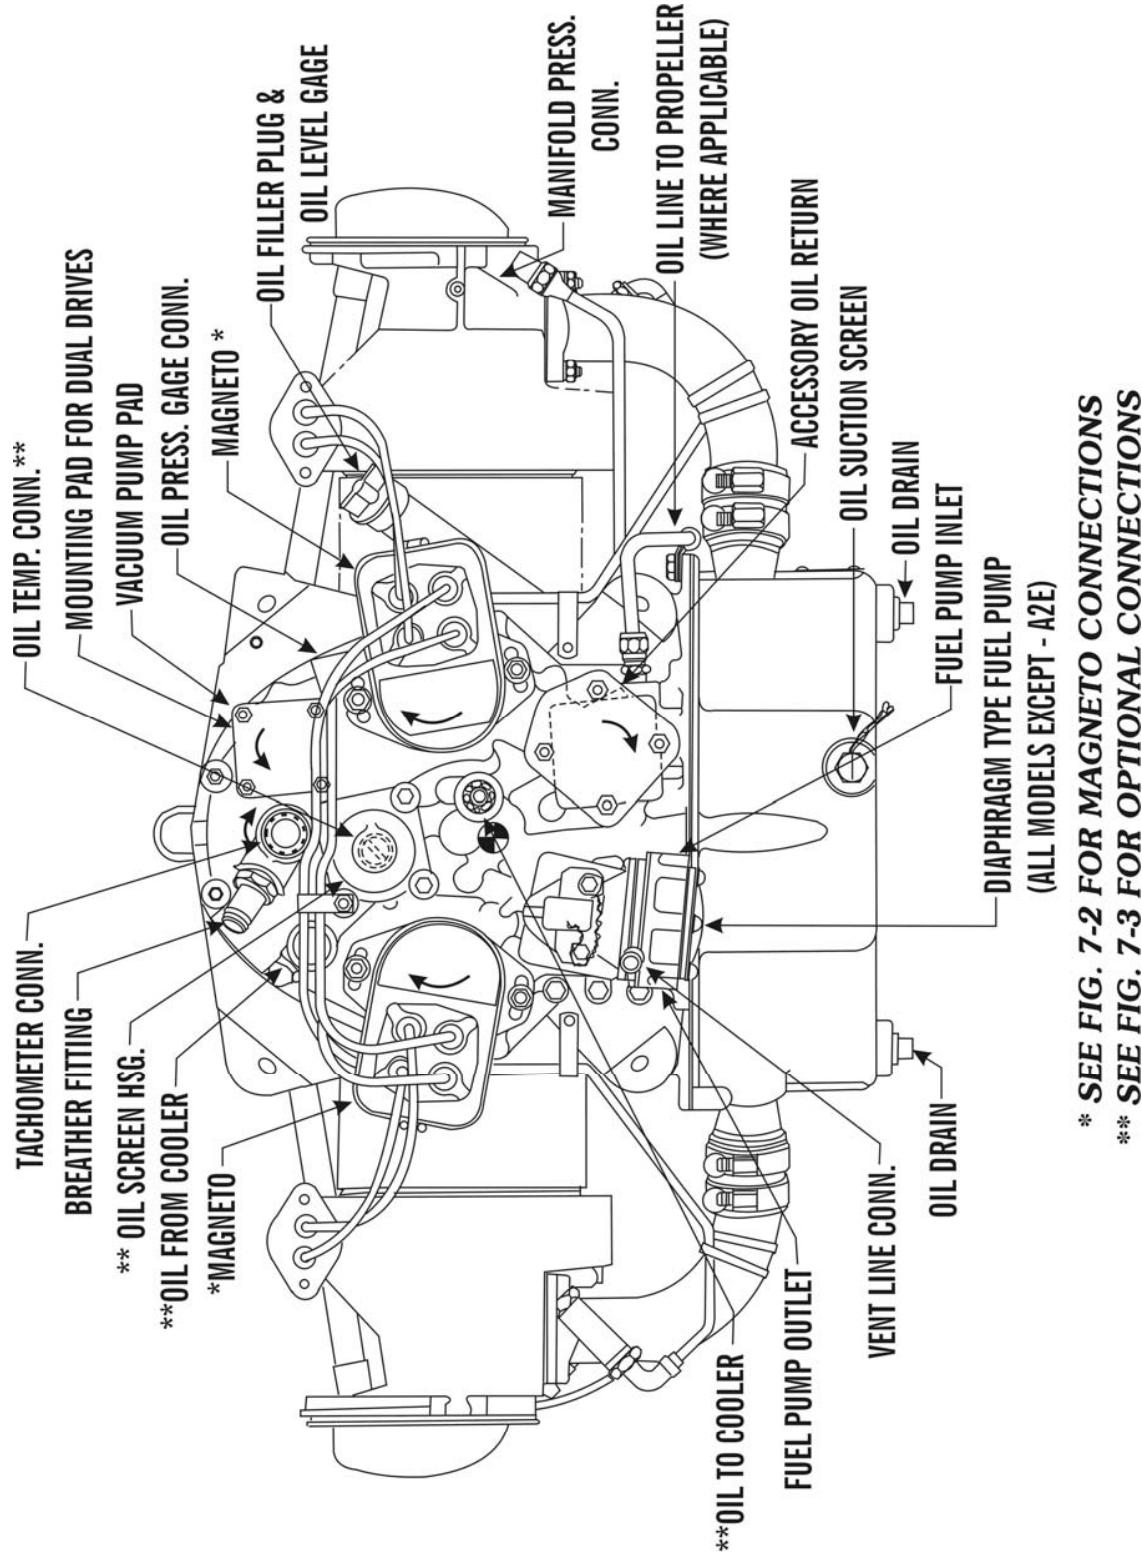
Installation Drawing – O-360-A, -B Series (Except -A1C, -A1G)
